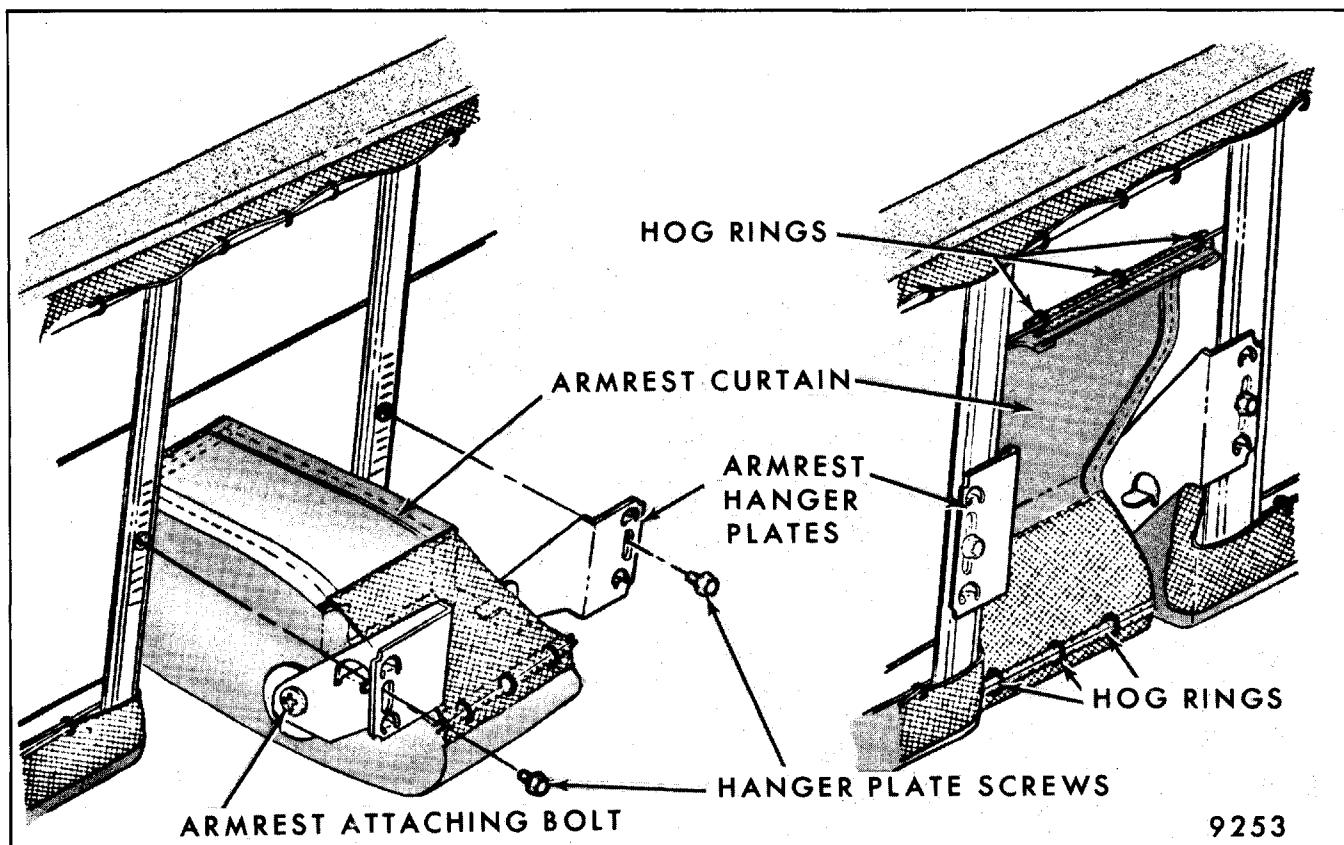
Rear Seat Back Center Armrest and Supports - All "C" Styles
